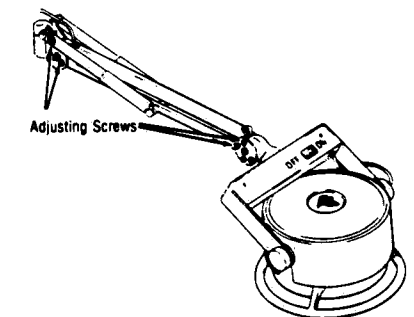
COUNTERBALANCE ADJUSTMENT.
